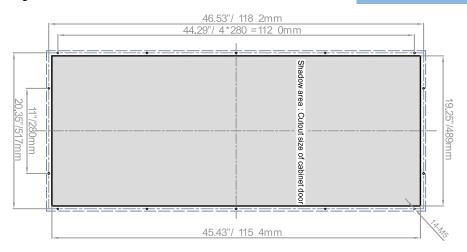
Dimensions for cut-out in enclosure door for the ACT-VCC-2000-AC
